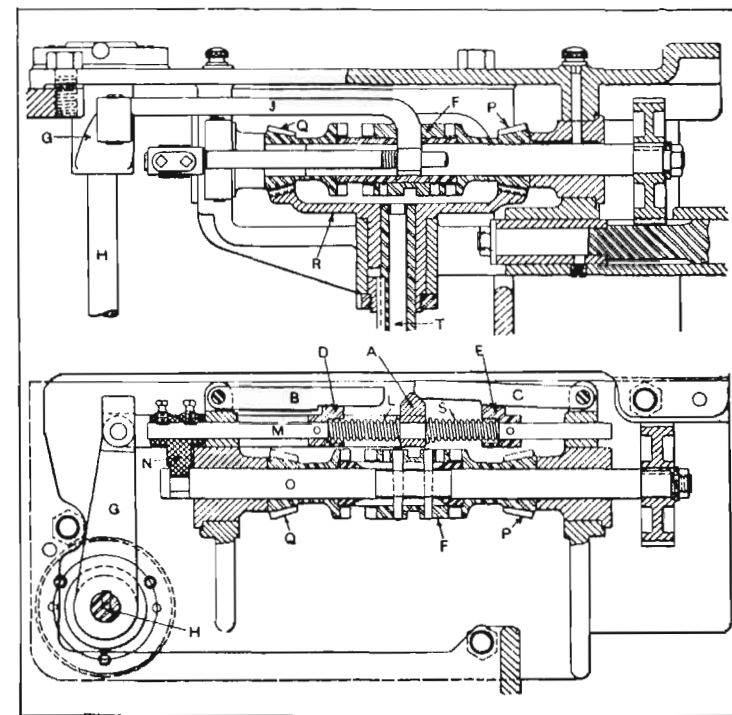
Spring and Latch Type of Reversing Clutch Control
